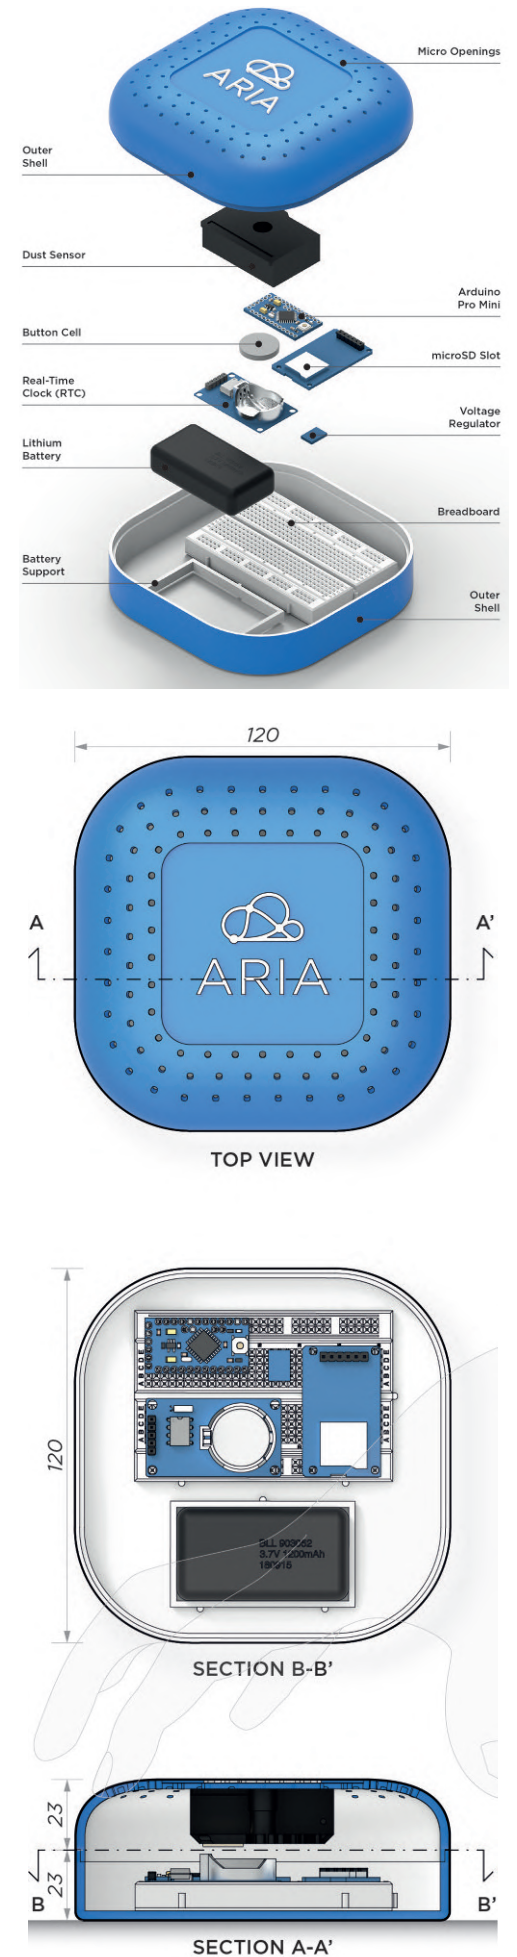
, 7 - The Device: Axonometric exploded view; Main dimensions and sections (quotes in mm).
